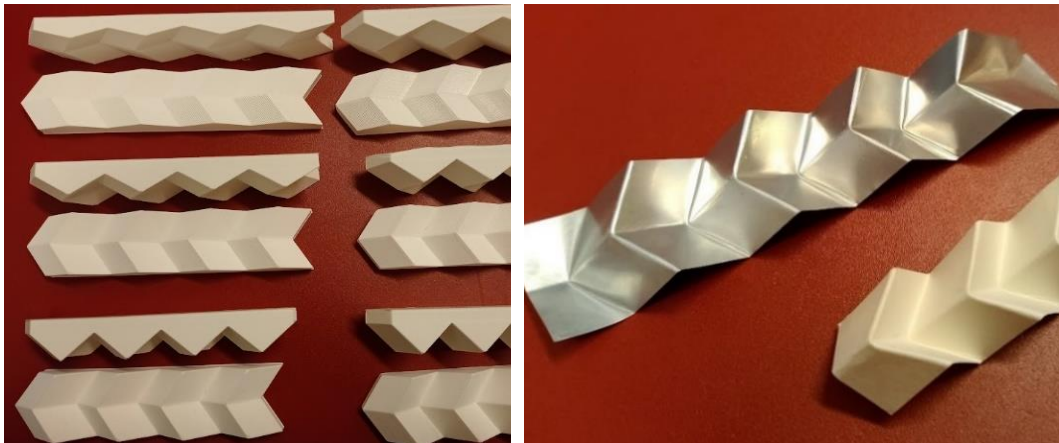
a) Gradually angled pressing moulds, 150°, 130°, 120°, 110°, 100° and 90°
